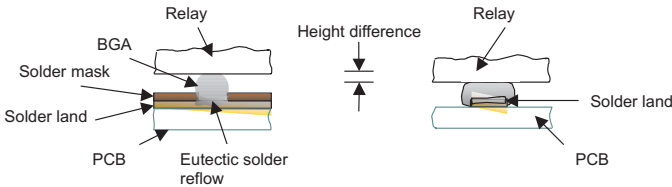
The effects of identical solder lands formed by masking and formed by routing. With solder wetting occurring on the sides of the routed land, a change in solder ball height will be evident.
